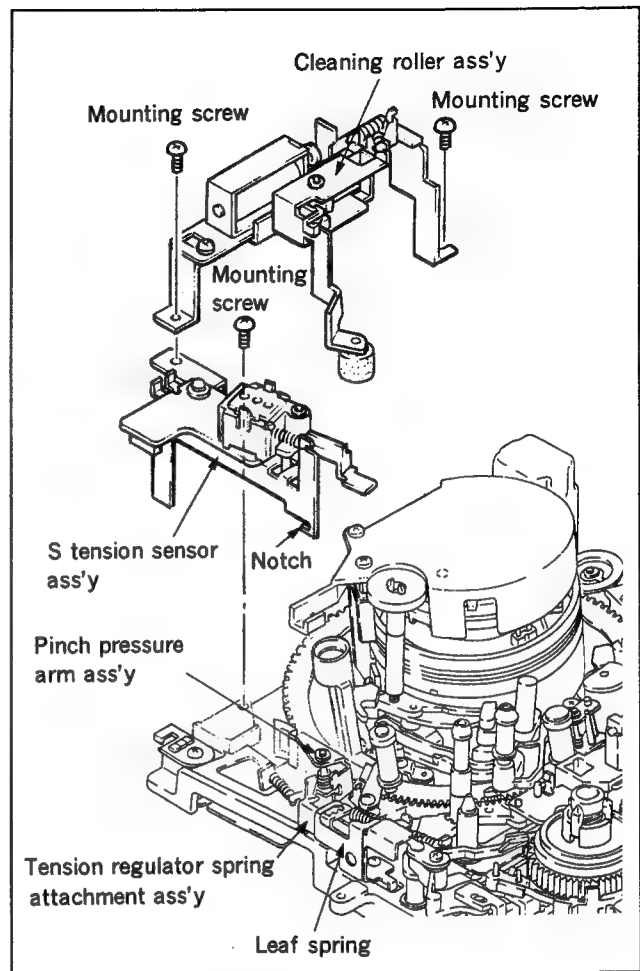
Removing the cleaning roller ass'y and the S. tension sensor ass'y
